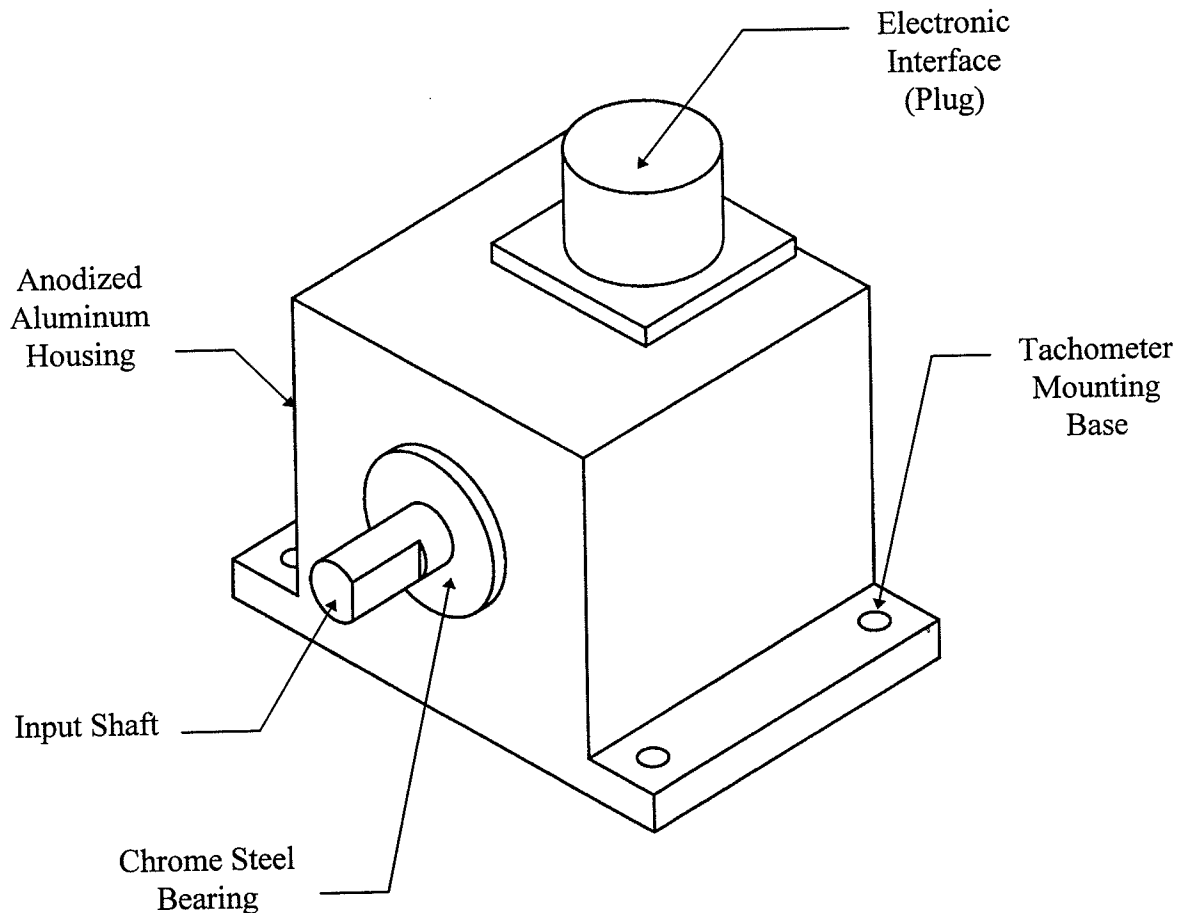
FSI model RSE-3/8 optical shaft encoder.
